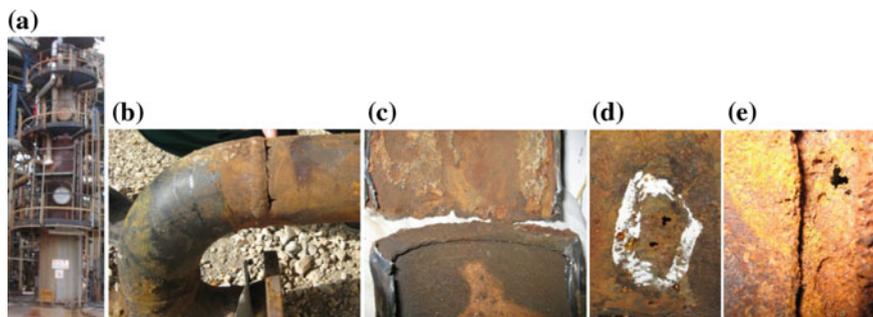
a The tower for absorption HCl by aqueous caustic soda solution (CCR unit) (the failed pipe is white luminous covered with aluminum jacket). b–d The pipe with circumferential hole in the weld (HAZ): b outside view. c Inside view. d The bend with two holes in the weld. e Corroded inner surface of the weld (HAZ) in the bend (with holes)
